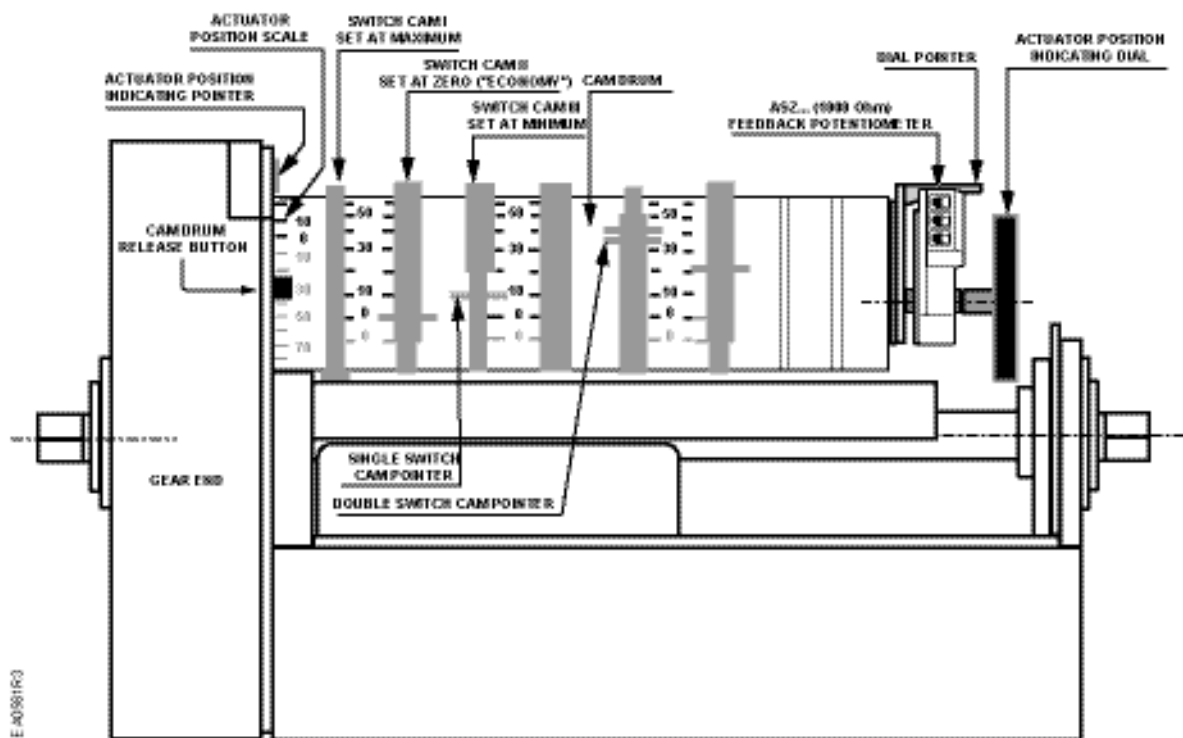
Component Identification on the Cam Drum Side of the SQM5 Actuator.
